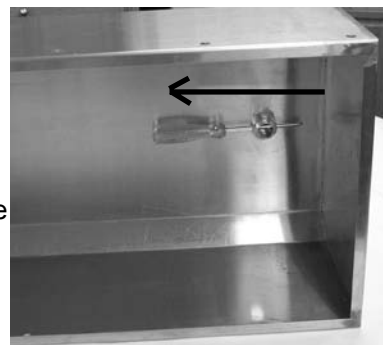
Use screwdriver to tighten float assembly. Position in direction of arrow.
